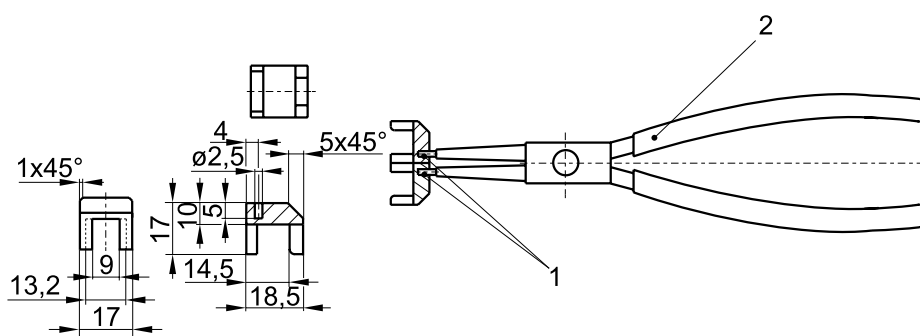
Tool for Inserting the Cable Plugs for the Temperature Sensor at the Cable Harness
